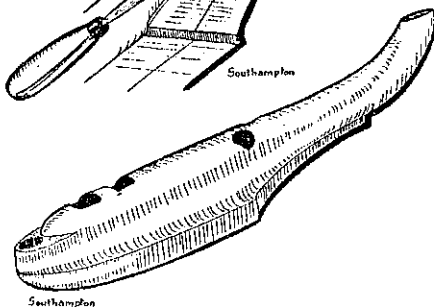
Cockpits drilled and section shaping of upper part of hull above chine lines completed.
